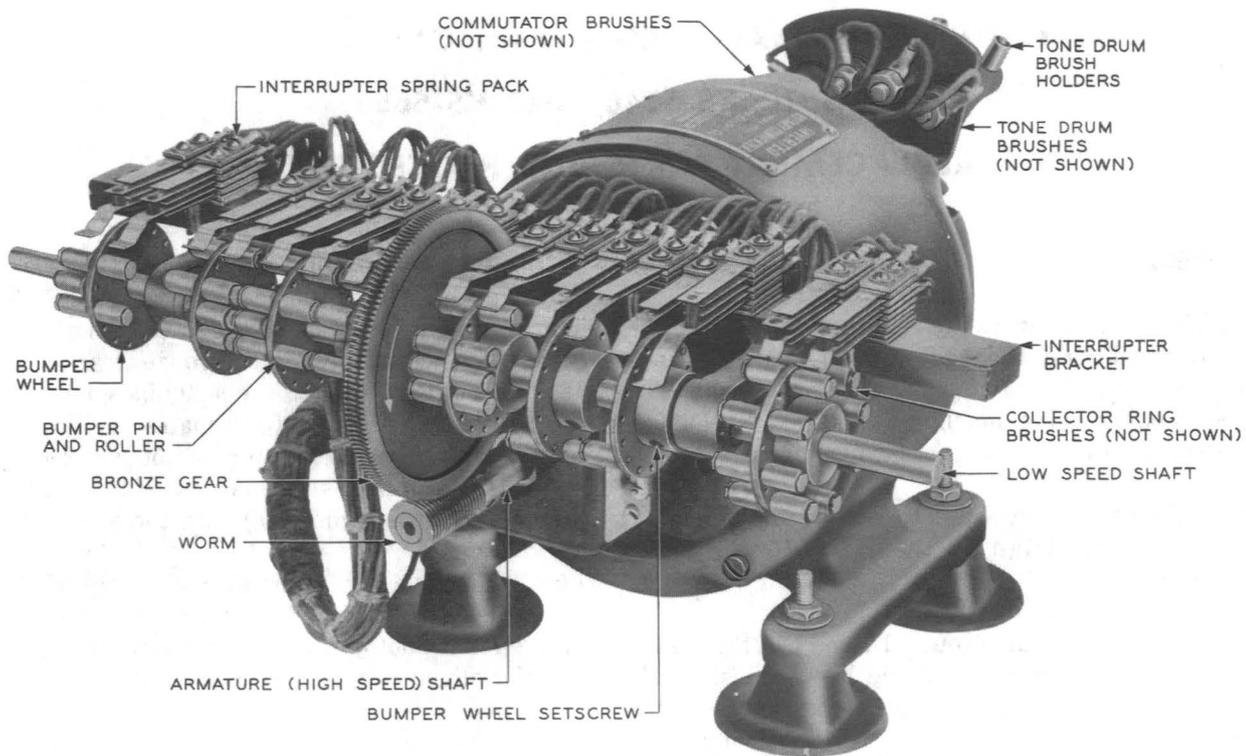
KS-5546 L2 Ringing Machine (Old Design)◀
